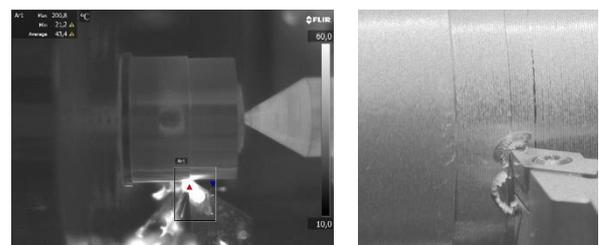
Thermal imaging camera image (a), chip forming mechanism (b) (cutting speed: 120 m/min, feedrate: 0.34 mm/rev, depth of cut: 1 mm)
